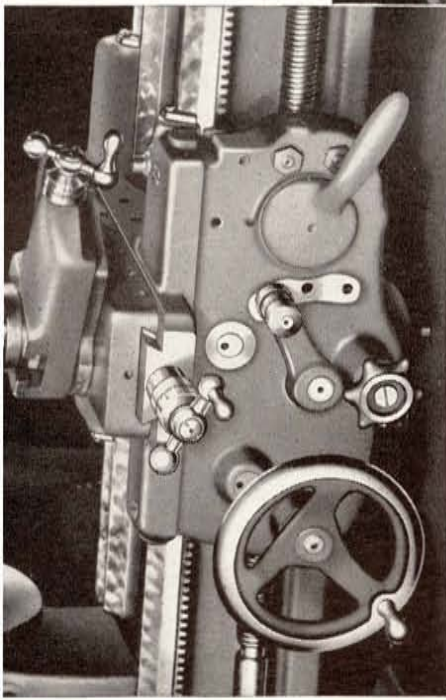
Above—Power Feed Apron for Model A and Model B 9-inch South Bend Lathes
